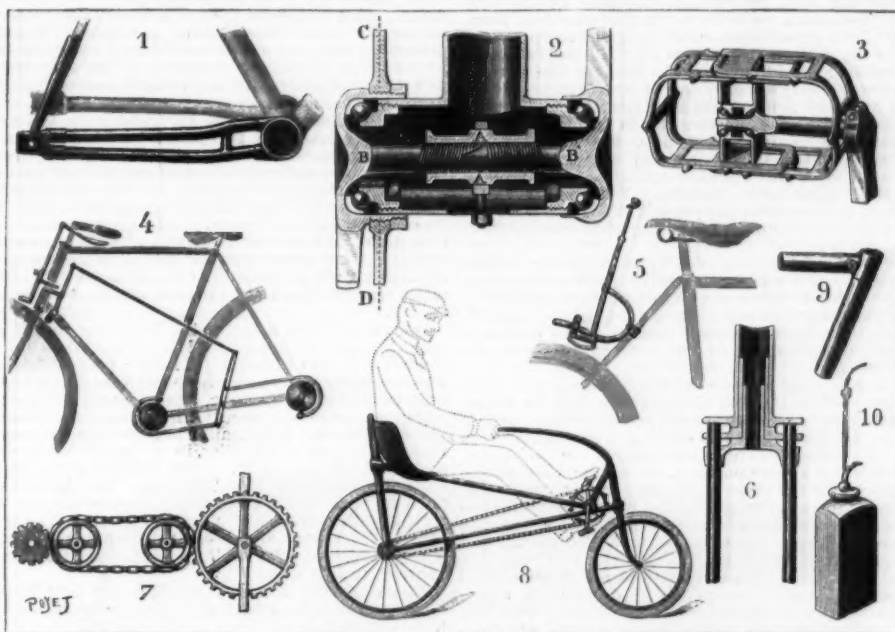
SPECIAL ARRANGEMENTS OF THE PARTS OF BICYCLES.
